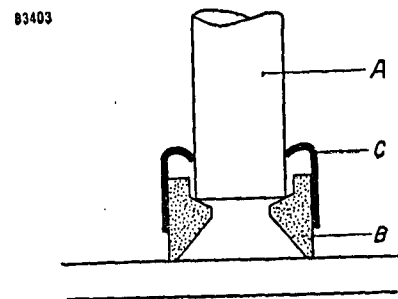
The welding cartridge, comprising a semi-conductive igniter element B and a cardboard collar C to hold it on the stud to be welded A. During welding, the ridge of the igniter element supporting the stud melts, thus enabling the stud to be pressed into the pool of molten metal.
